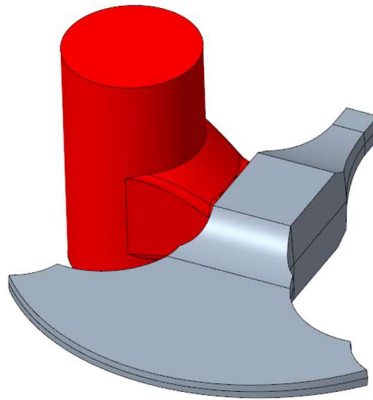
It was determined by the CAD designers at Harrison Steel that a side riser would produce the best result for our casting.
